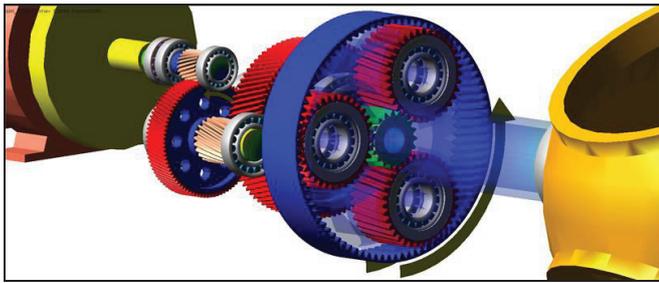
Gear system inside the gearbox. Three stages are used: a planetary stage
